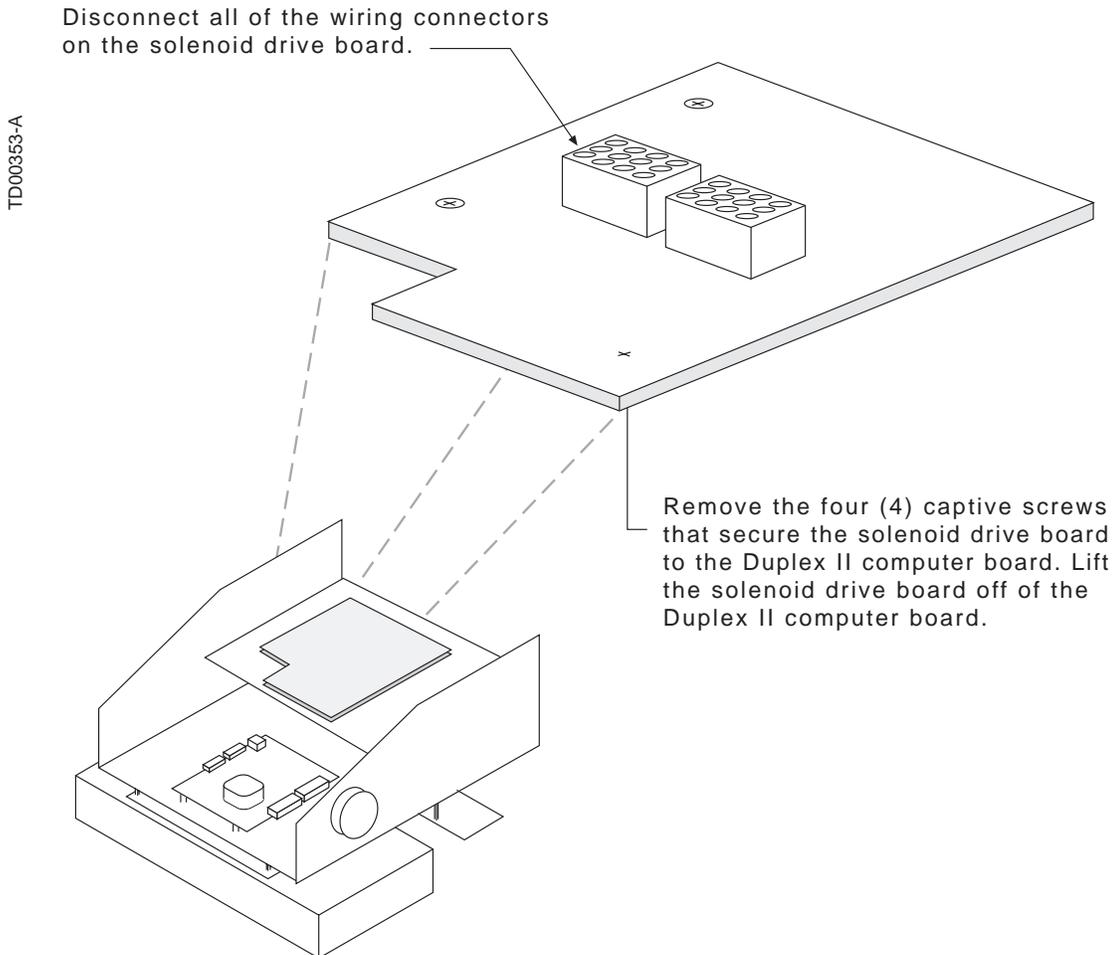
REPLACING THE SOLENOID DRIVE BOARD (NON-BLENDER SHOWN). *Even though the dispenser control power is turned off voltage may still be present at the solenoid drive board. This condition will continue until both J1 and J2 connectors are removed from the solenoid drive board.
